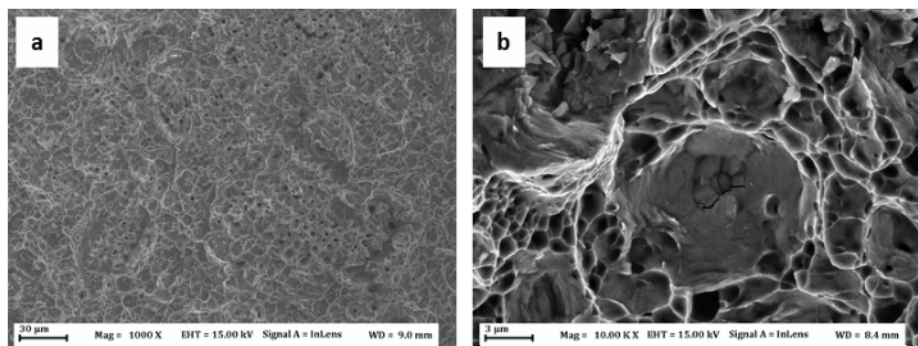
Hatching region on the fracture surface of a CVN test sample produced from virgin powder.
